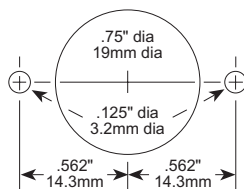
The mounting hole pattern into which the 9-pin chassis-mount Iso-socket fits is shown above. Note that this pattern is the same as that used by the great majority of conventional 9-pin chassis mount sockets and on that account retro-fitting Iso-sockets into existing equipment is very straightforward
